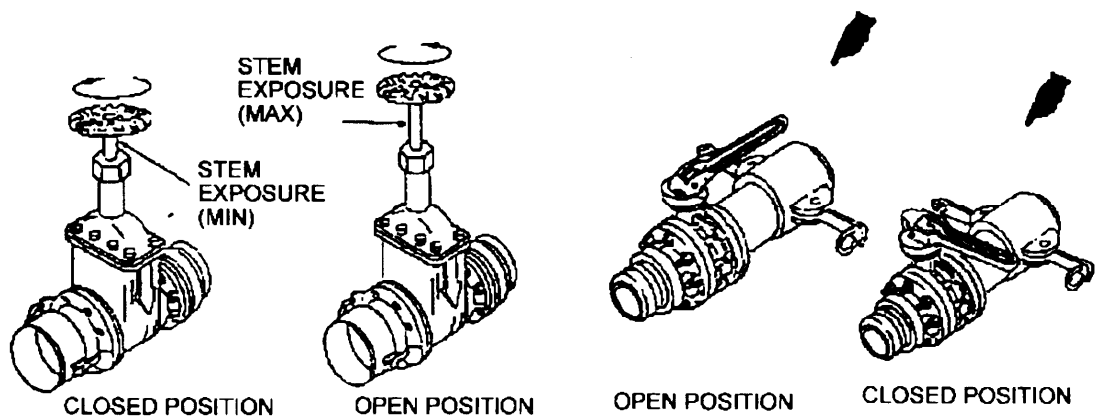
Gate Valve or Butterfly Valve in Closed and Open Positions.
